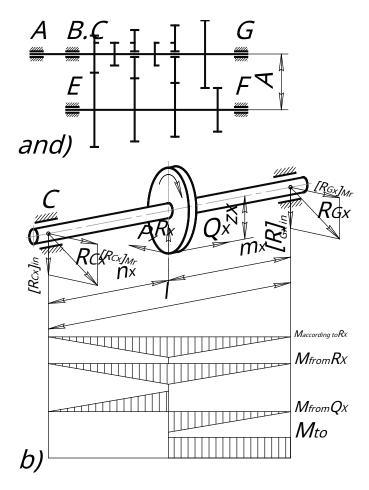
Calculation schemes of the secondary shaft with helical gears
